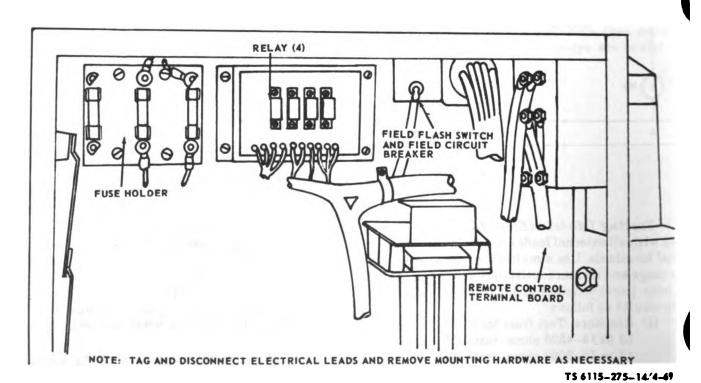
Remote control terminal board, removal and installation (Model MEP-018A).
